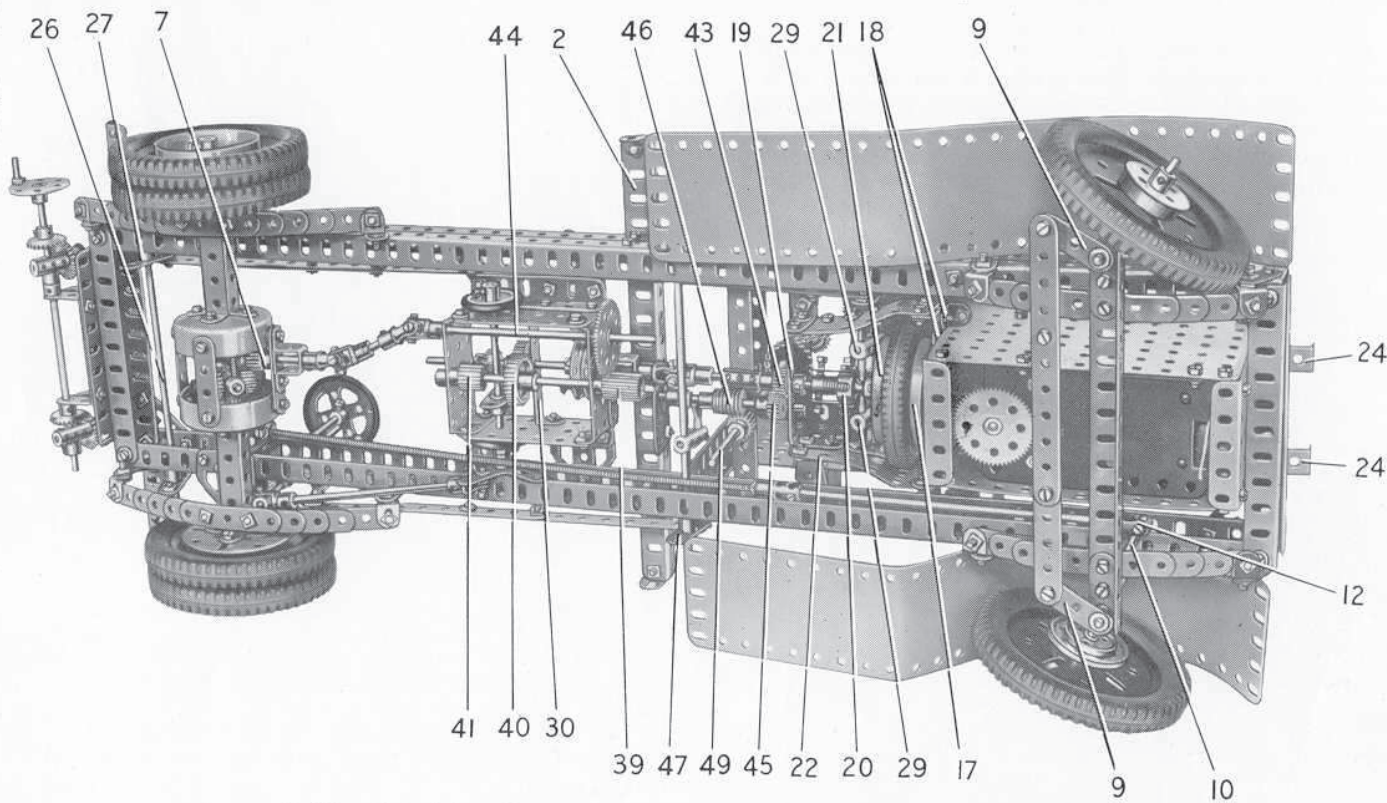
This underneath view of the Snow Loader chassis reveals the arrangement of the drive to the front wheels
